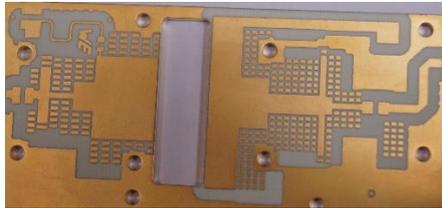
Fabricated Multi- Layer PA PCB - Top side
